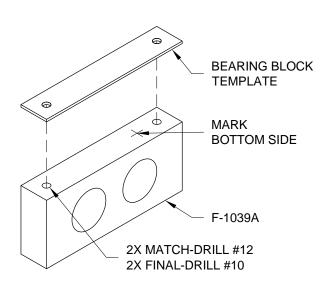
DRILL RUDDER PEDAL BEARING BLOCKS
